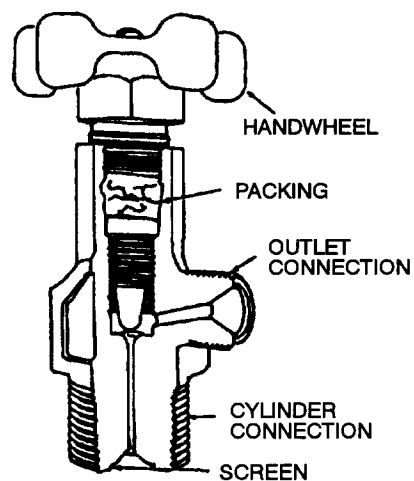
Cutaway View of a Packed Cylinder Valve
